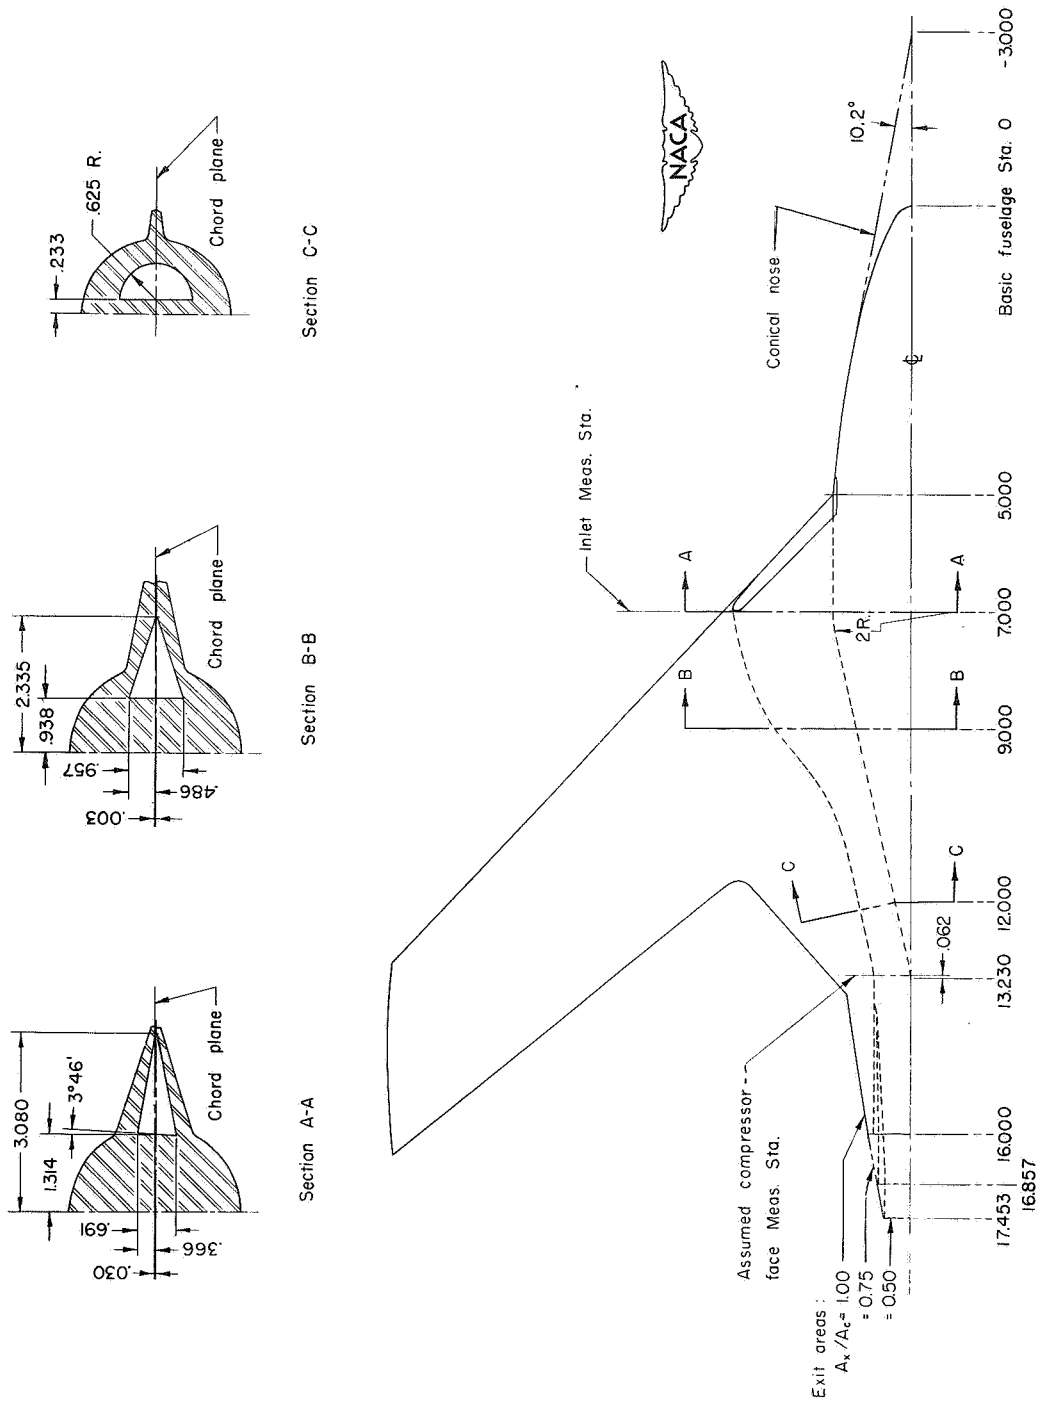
Plan view of inlet model showing details of internal ducting and exit configuration. All dimensions are in inches.
